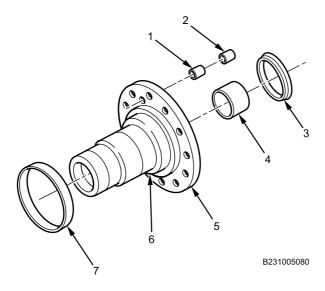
Spindle and ABS Sensor Sleeve and Clip.
